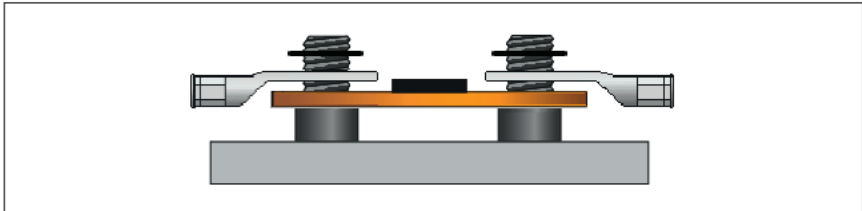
HV BM 1.2+S, placing ring terminals and washers on the threaded bolts
